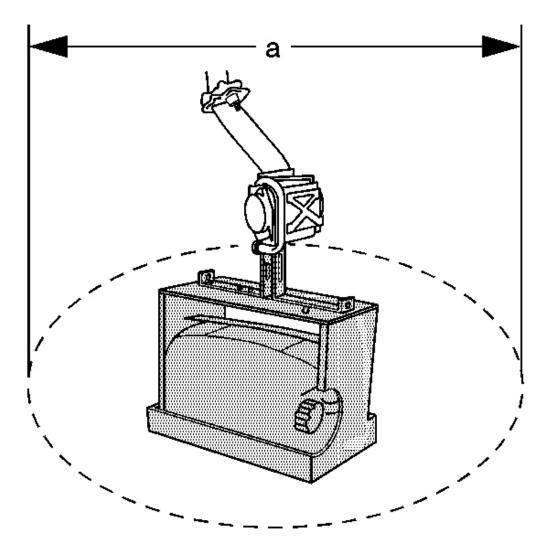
Illustrating Proper Space For Deployment Of Pretensioner Courtesy of GENERAL MOTORS CORP.
